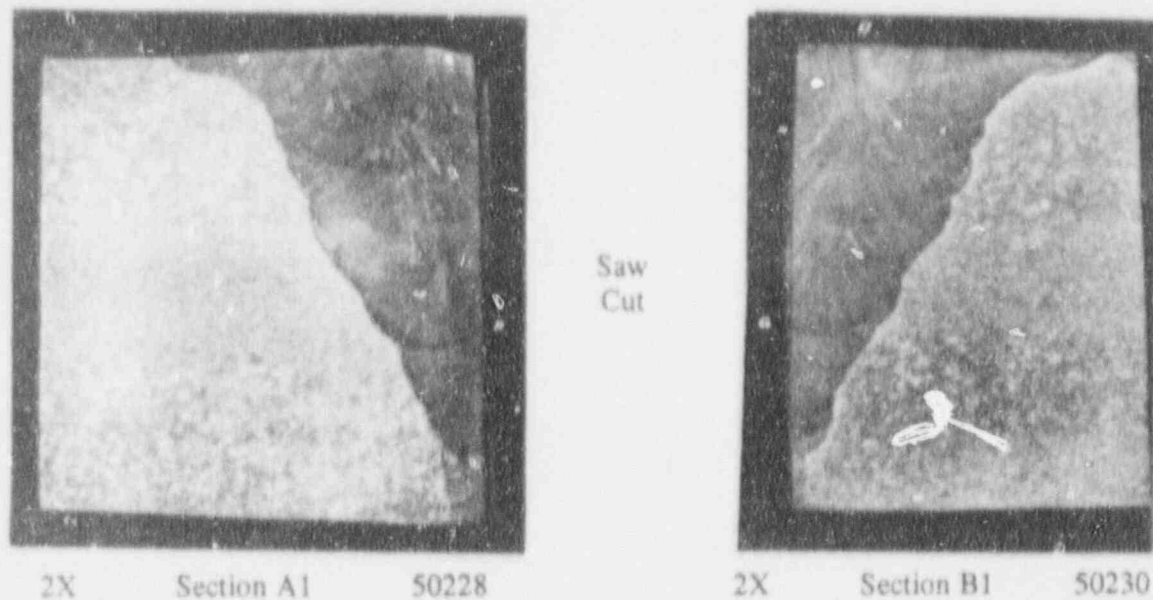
Cross sections showing the location of the saw cut notch in the weld
